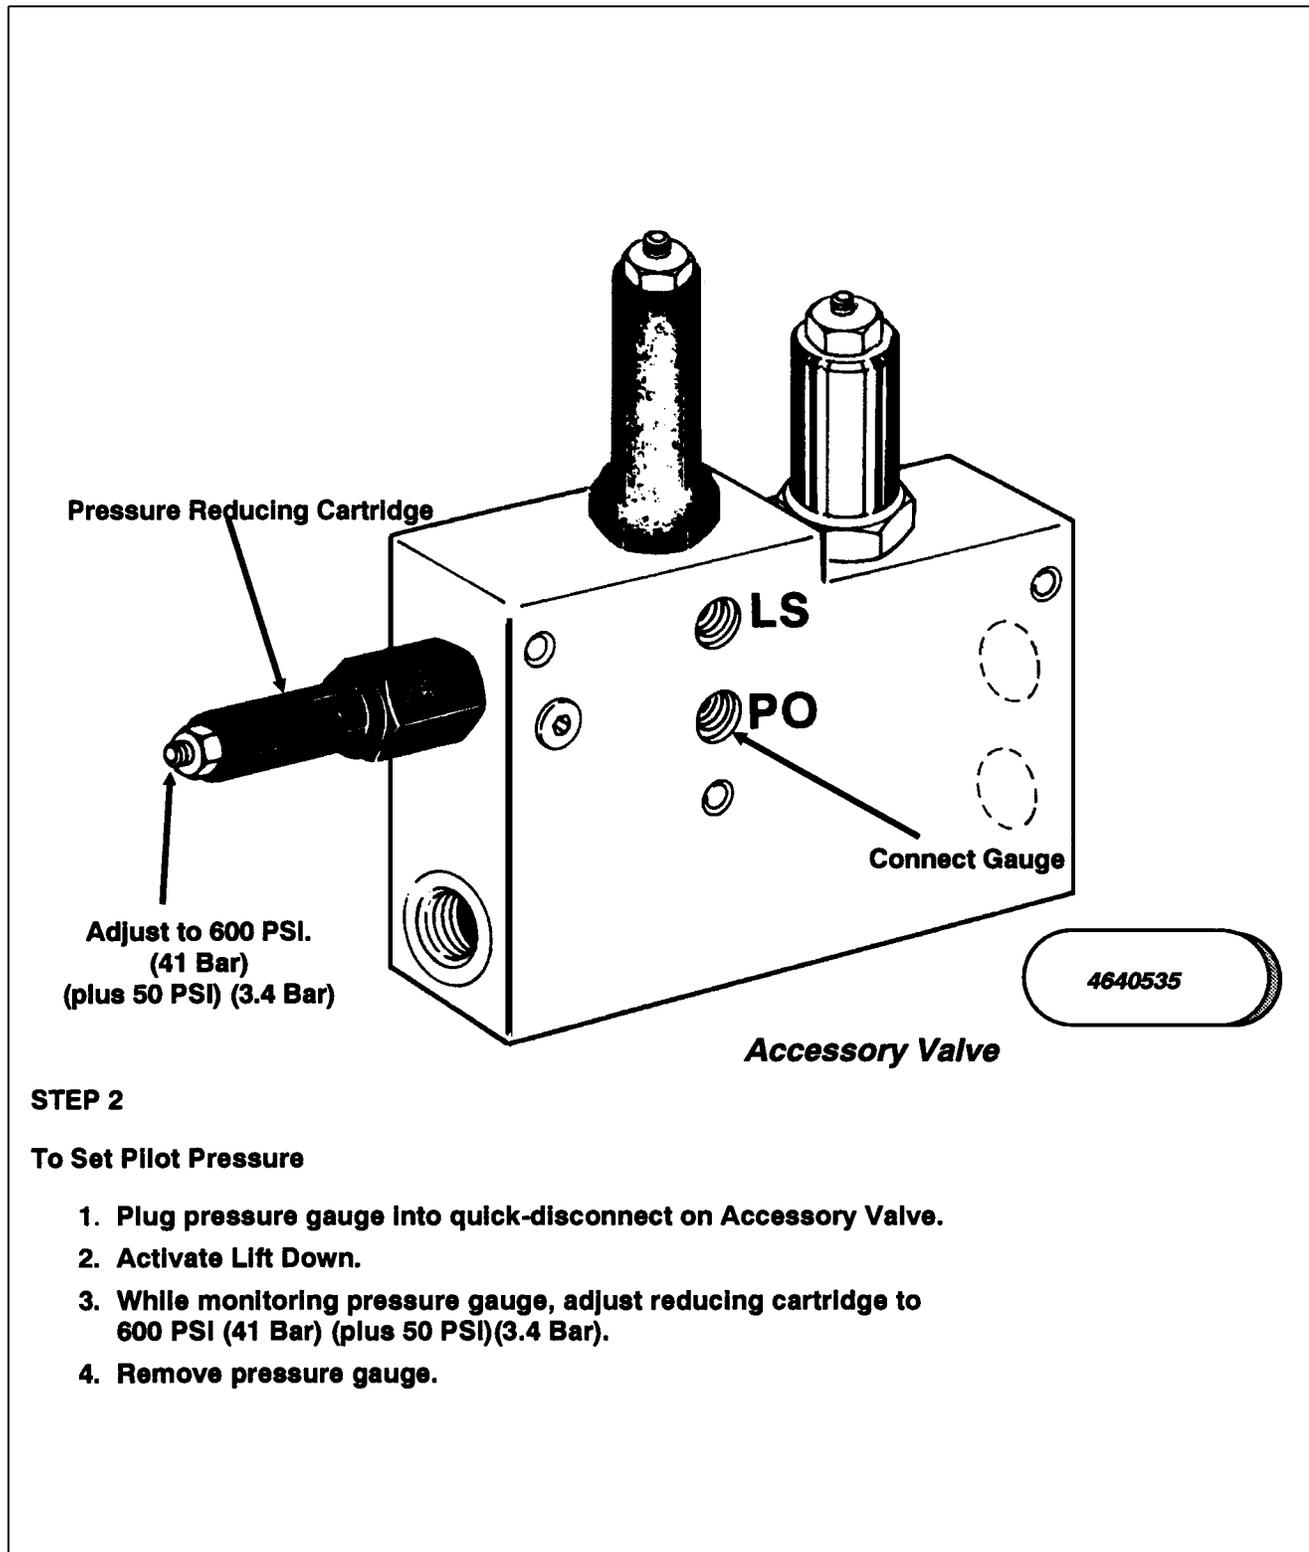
Vickers Proportional Valve Pressure Setting, Machines Built Prior To 1989 With Accessory Valve. (Sheet 2 of 4)
